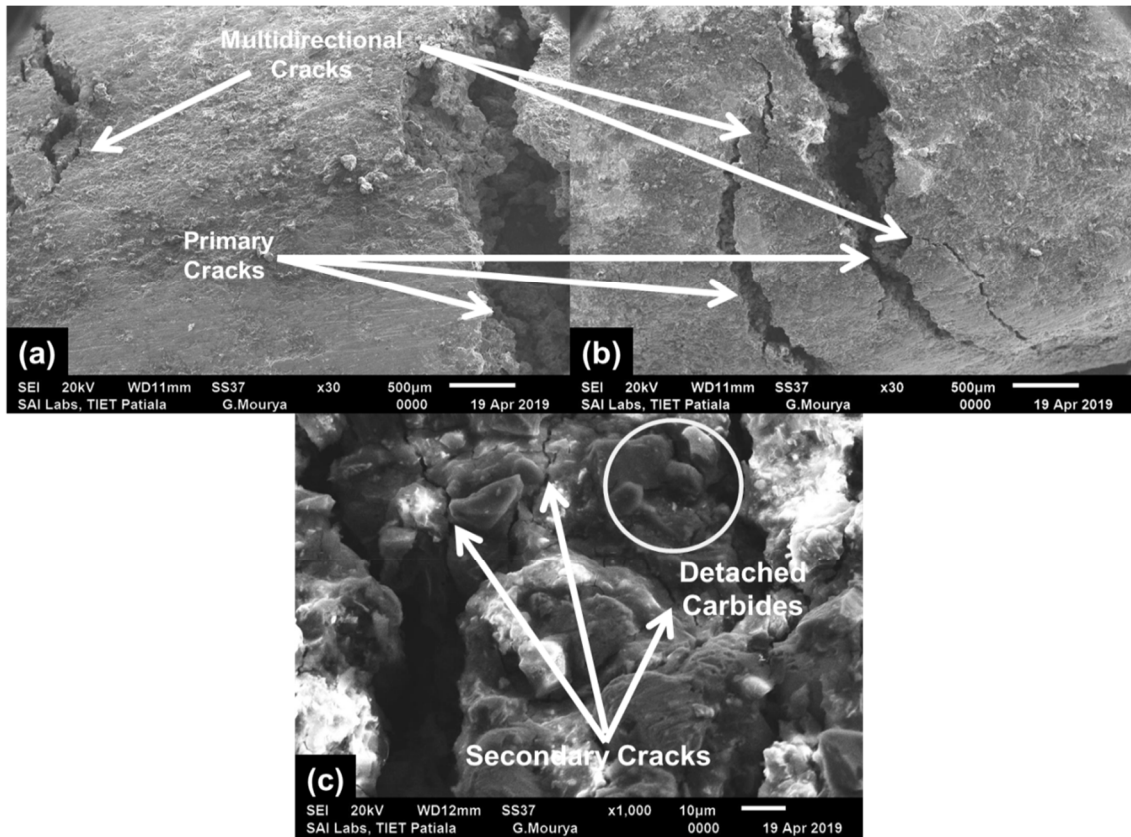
SEM micrographs of the fractured specimen of Ni-Based/40Cr₃C₂ composite clad after three-point bend test showing (a) Multidirectional Cracks (b) Primary cracks (c) Secondary cracks
